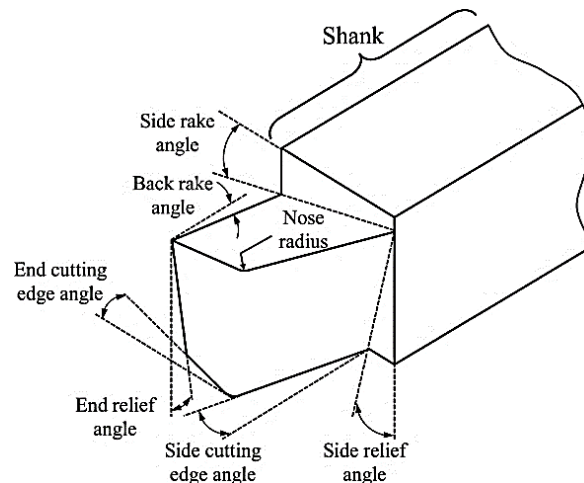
Geometry of Single Point Cutting Tool [3]
